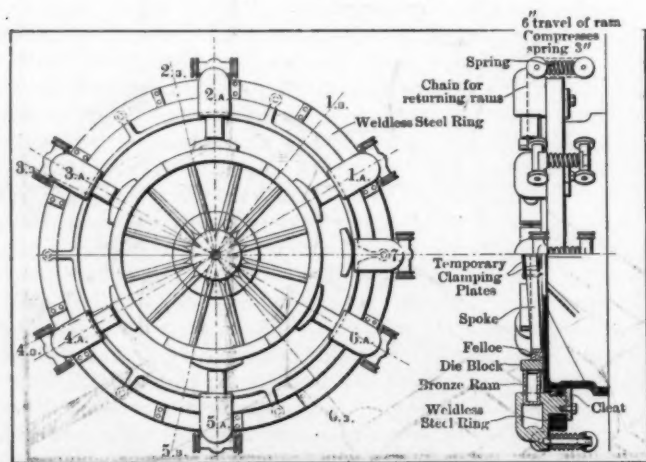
Plan and cross section of hydraulic rams used in building wood wheels
